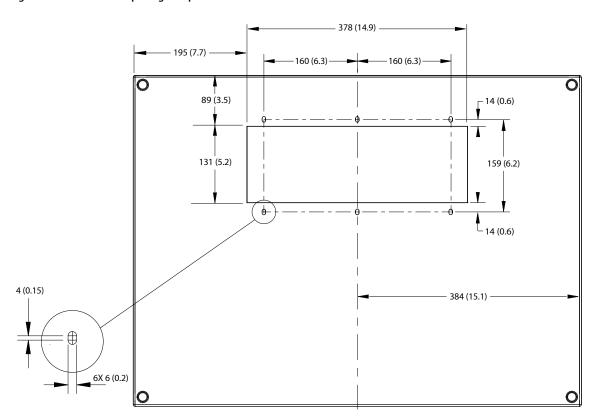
Dimensions of Opening in Top Plate of VX25 Cabinet
